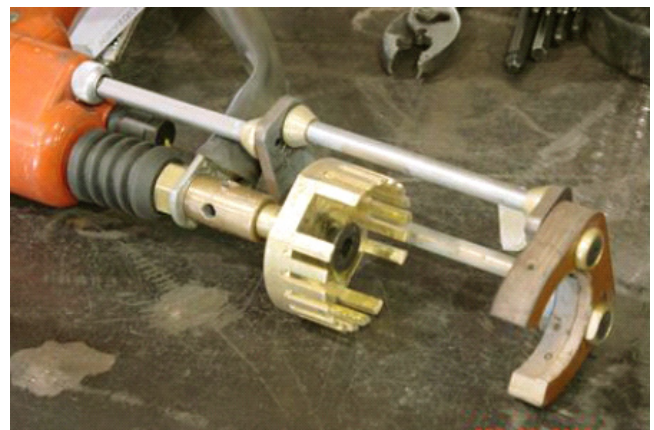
Welding gun with the special chuck used with the 31.8 mm (1¼ in.) headed stud.
